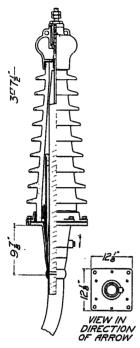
DRAWING SHOWING CONSTRUCTION OF A 73,000-VOLT SINGLE-CONDUCTOR OIL-FILLED TERMINAL FOR LEAD-COVERED CABLE
